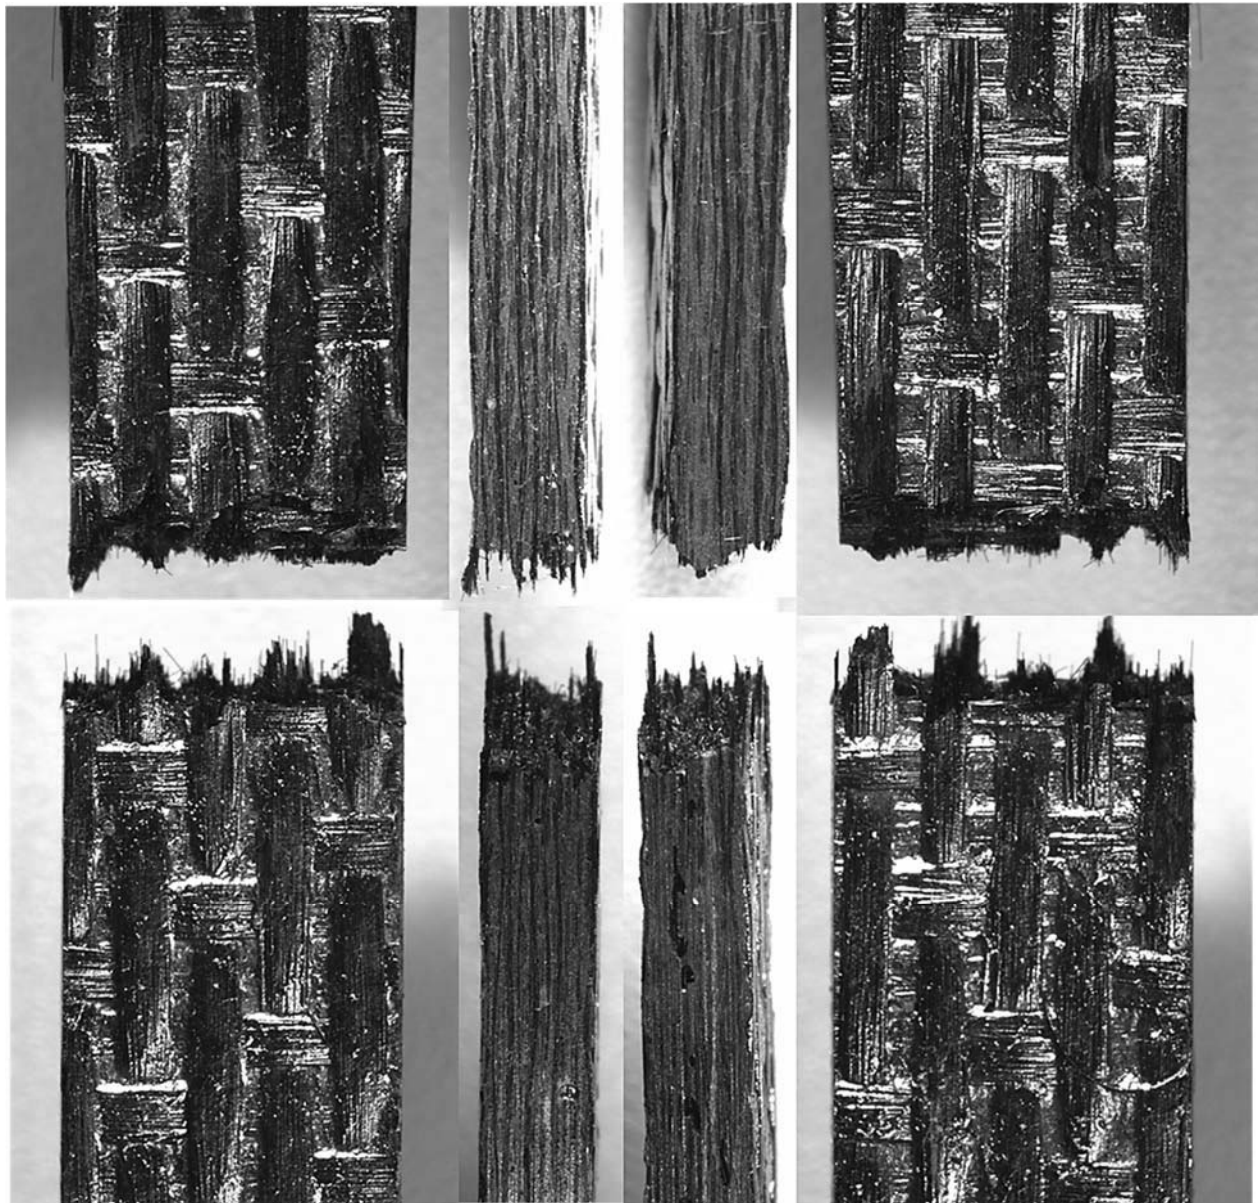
Top and bottom fracture surfaces of specimen 16-059, tested in tension to failure at 1200°C in air.
